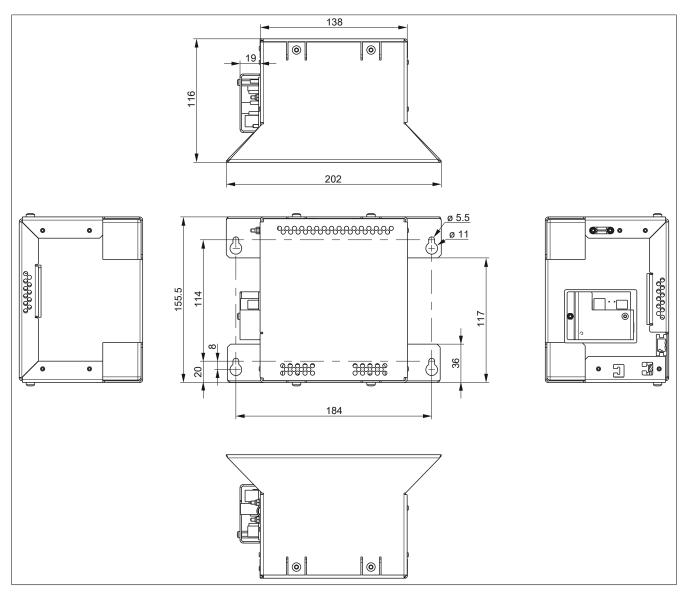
9A0100.12 ≥ Rev. G0 - Dimensions
